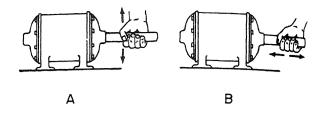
Checking motor or generator shaft; (A) vertical movement and (B) end-play movement.
